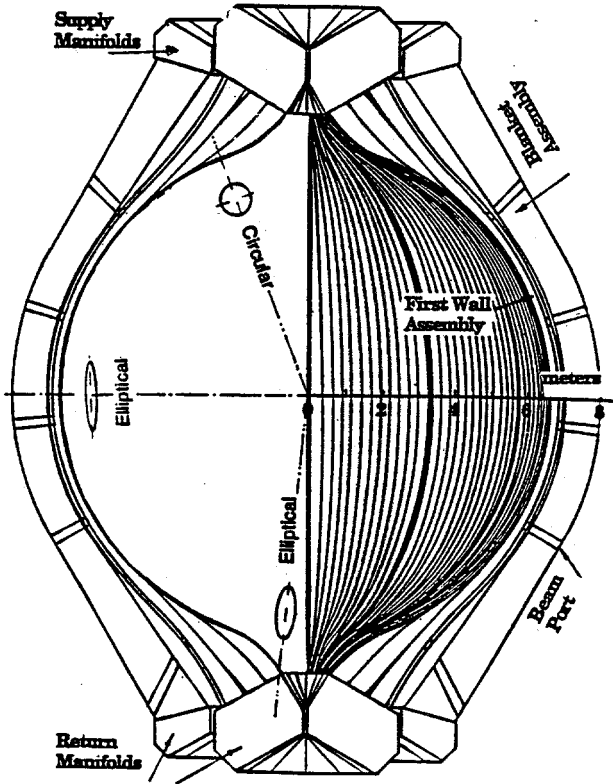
Cross section of the first wall assembly showing the cross section of the first wall coolant tubing.
